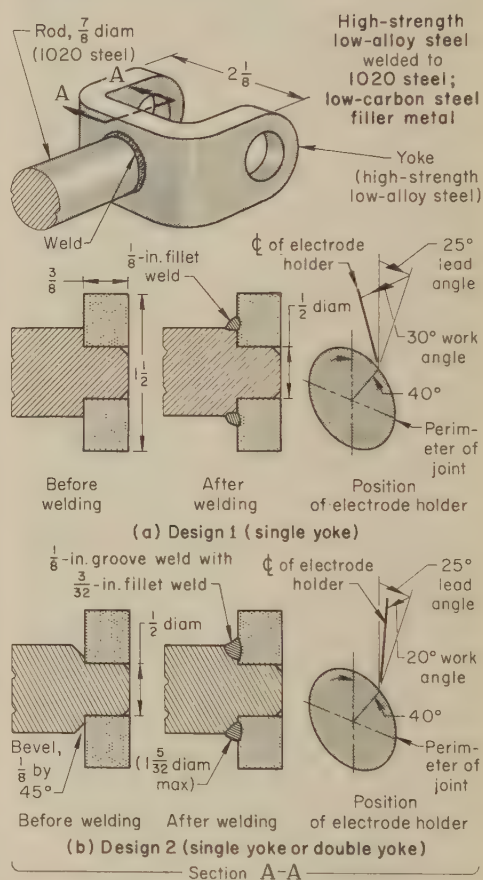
shows two designs of joints used in welding 1020 steel rods to yokes made of high-strength low-alloy steel (0.22 max C, 1.25 max Mn, 0.04 max P, 0.05 max S, 0.30 max Si, 0.02 to 0.07 V, 0.20 min Cu), in the production of single-yoke and double-yoke universal-joint assemblies. These weldments were used in steering mechanisms for trucks and agricultural machines, and were required to withstand a testing torque of 4000 in.-lb. In addition, the welds made in the assemblies of bevel-joint design (Fig. 31b) had to be held to close dimensional tolerances to avoid subsequent machining in the weld area. These requirements were met by the use of automatic gas metal-arc welding, under the conditions listed in the table with Fig. 31.
